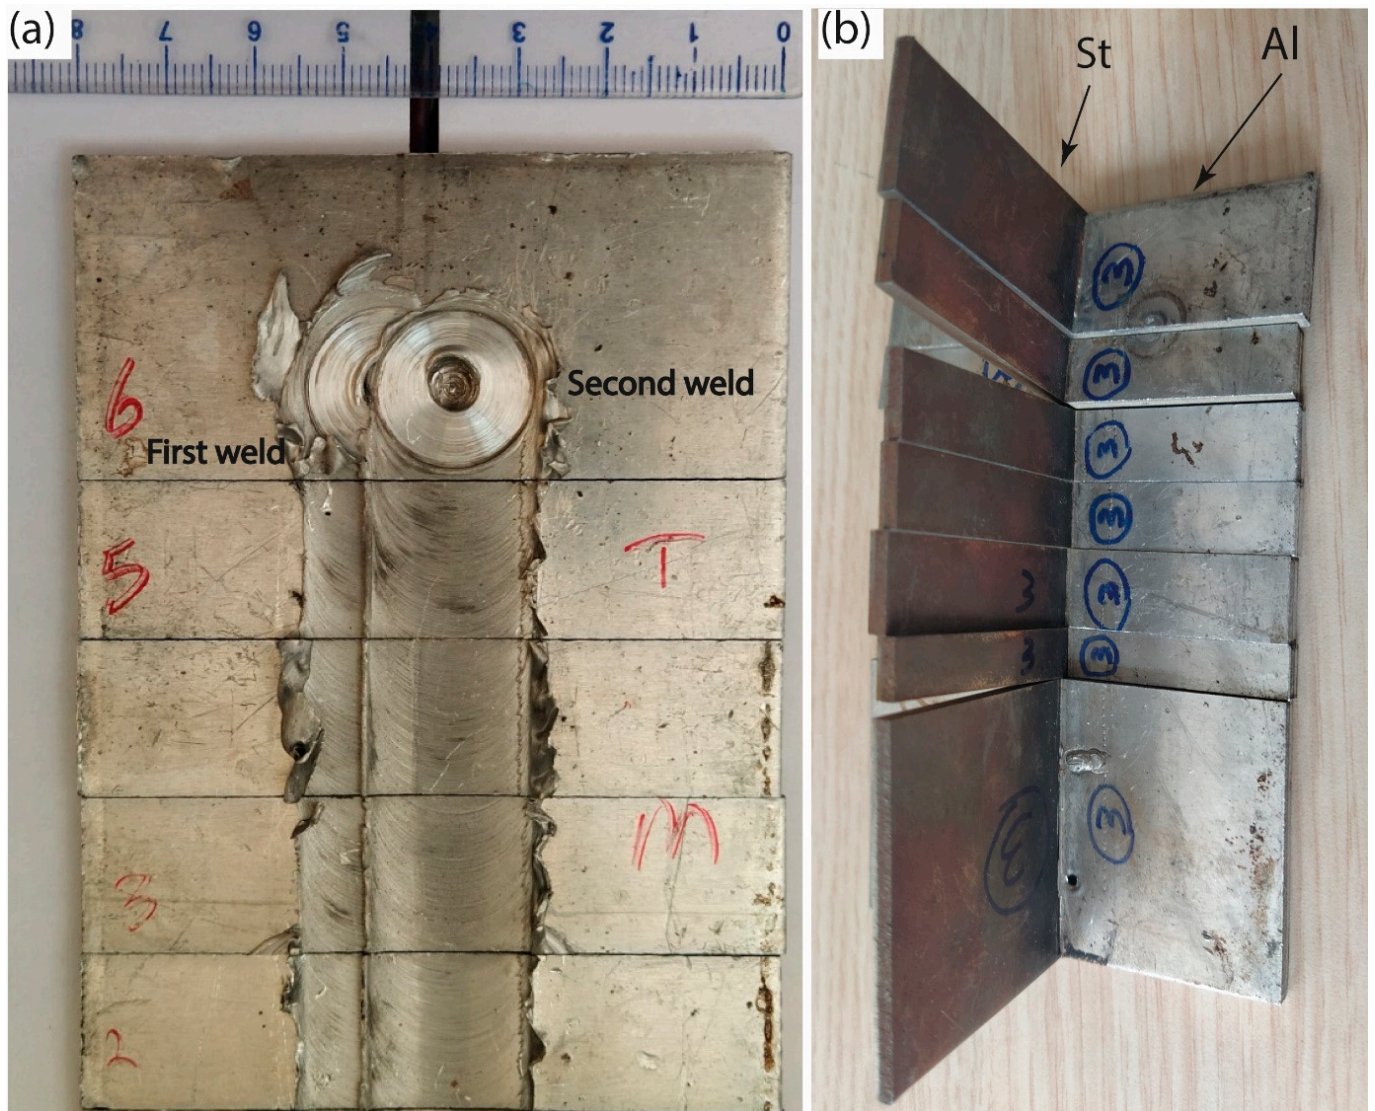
(a) Crown of the weld showing the skin side of the T-joint. (b) Cut specimens that were used for both microstructure and mechanical testing.
